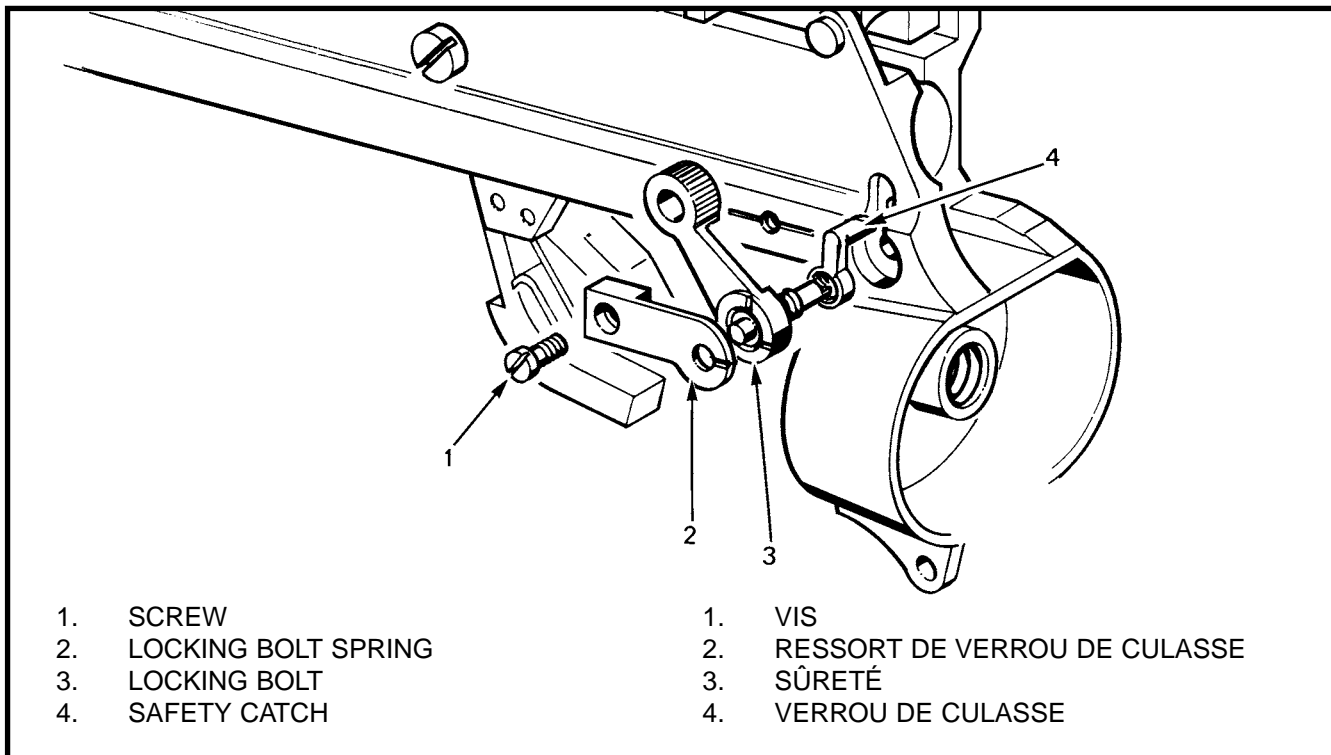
Removing the Bolt Locking Assembly (Safety)
